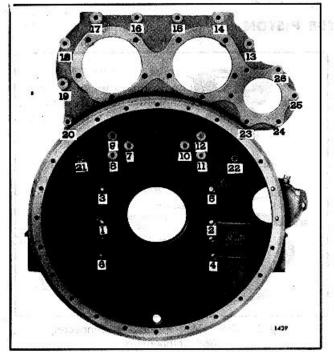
Flywheel Housing Bolt Tightening Sequence (Operation 2)
